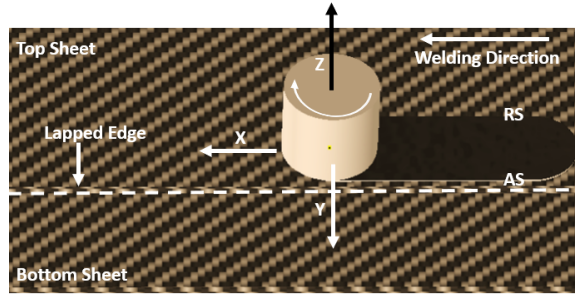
Schematic of welding setup. The dynamometer measures forces in the axial (Z), lateral (Y), and traverse (X) directions in addition to the torque around the rotation axis. The weld direction goes from right to left.
